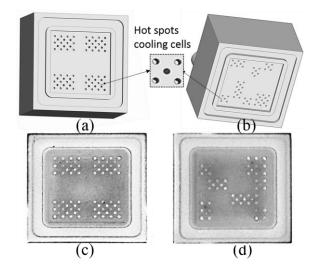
Bottom view of the hotspot targeted coolers revealing the nozzle array for (a) test case 1 and (b) test case 2. Photographs of the nozzle plate of the fabricated coolers for (c) test case 1 and (d) test case 2.
